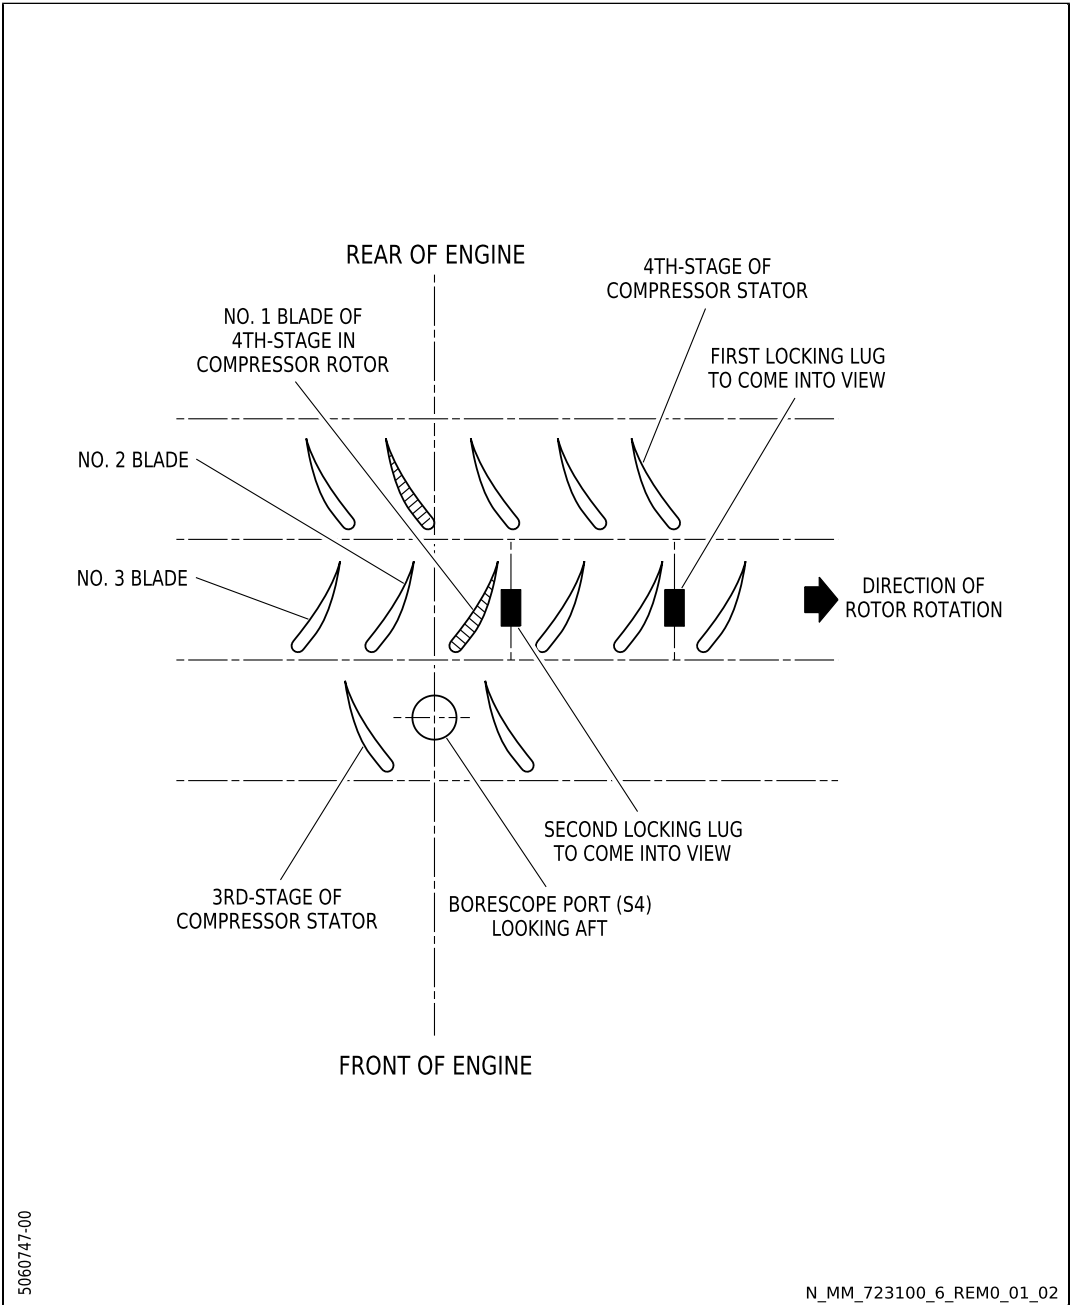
A (SHEET 1) - HPC Rotor Indexing to Zero
